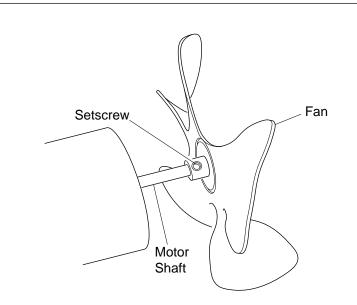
Fan, Motor Shaft, and Setscrew Location
